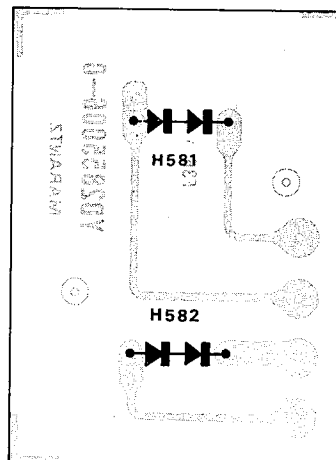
Meter Rectifier Unit Assembly P550 Component Locations
